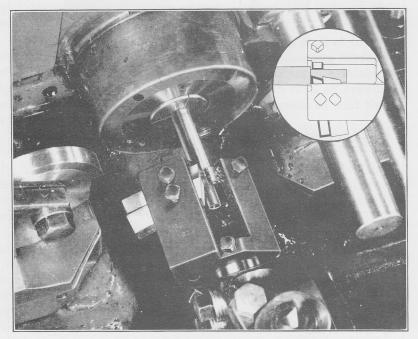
Box Tool with V-Block back rest taking finishing cut
